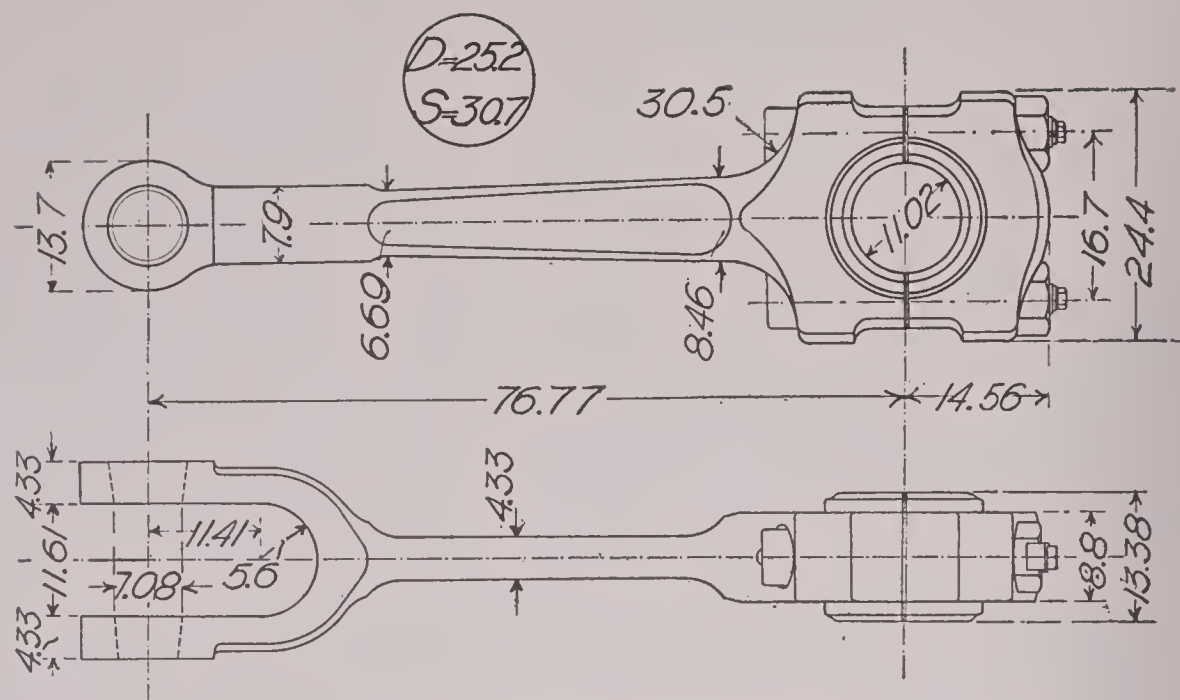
Connecting Rod for a 20 H P. Bánki Engine (using water injection). Built by Ganz & Co., Budapest.
